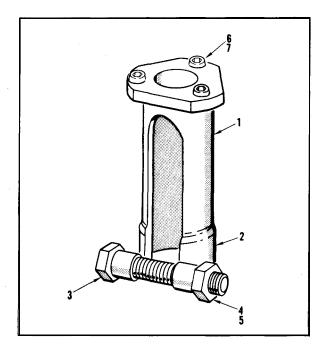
Vibration Transducer Power Turbine Adapter, Part No. 171579, Location of Parts
